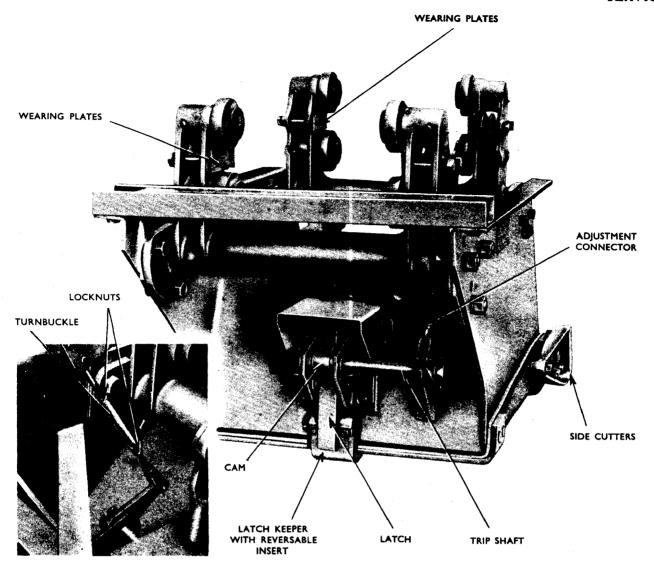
The Skimmer Bucket - Dipper Trip and Wearing Plates.
